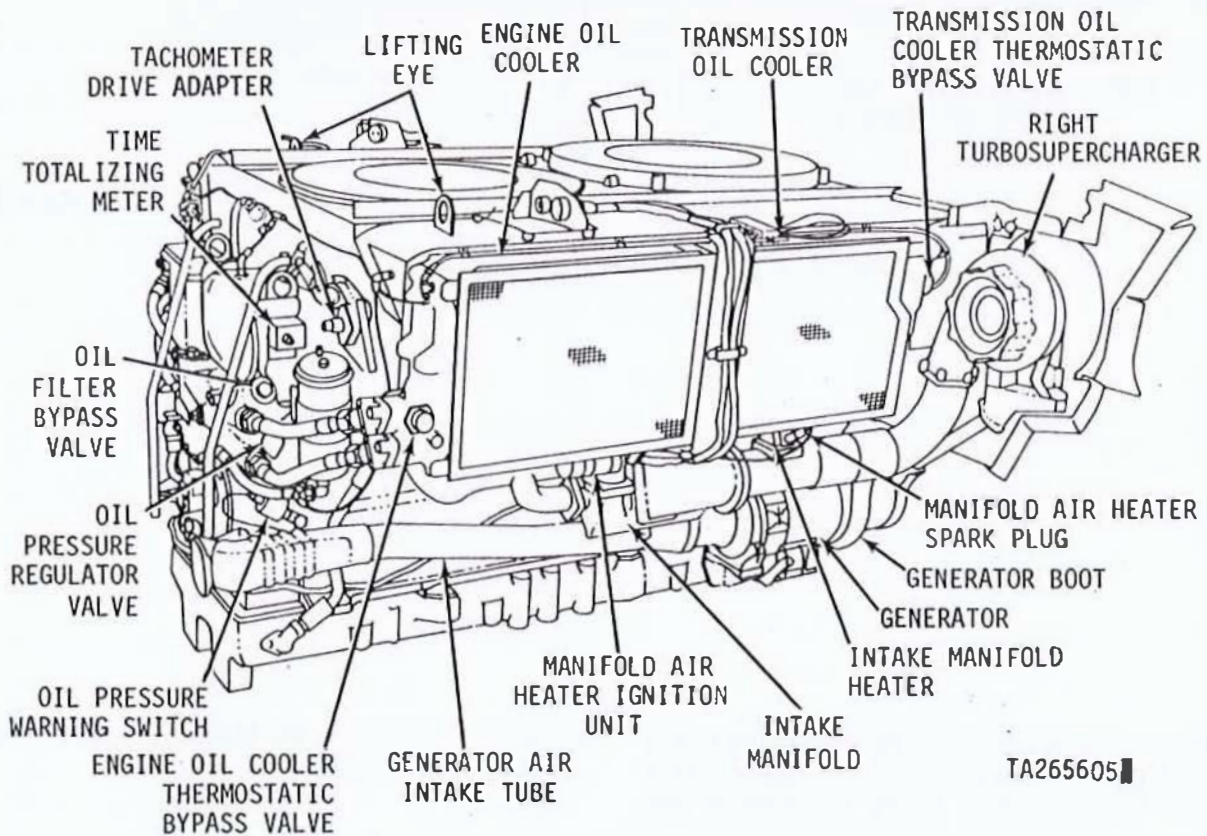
AVDS-1790-2D engine assembly - right front view.
